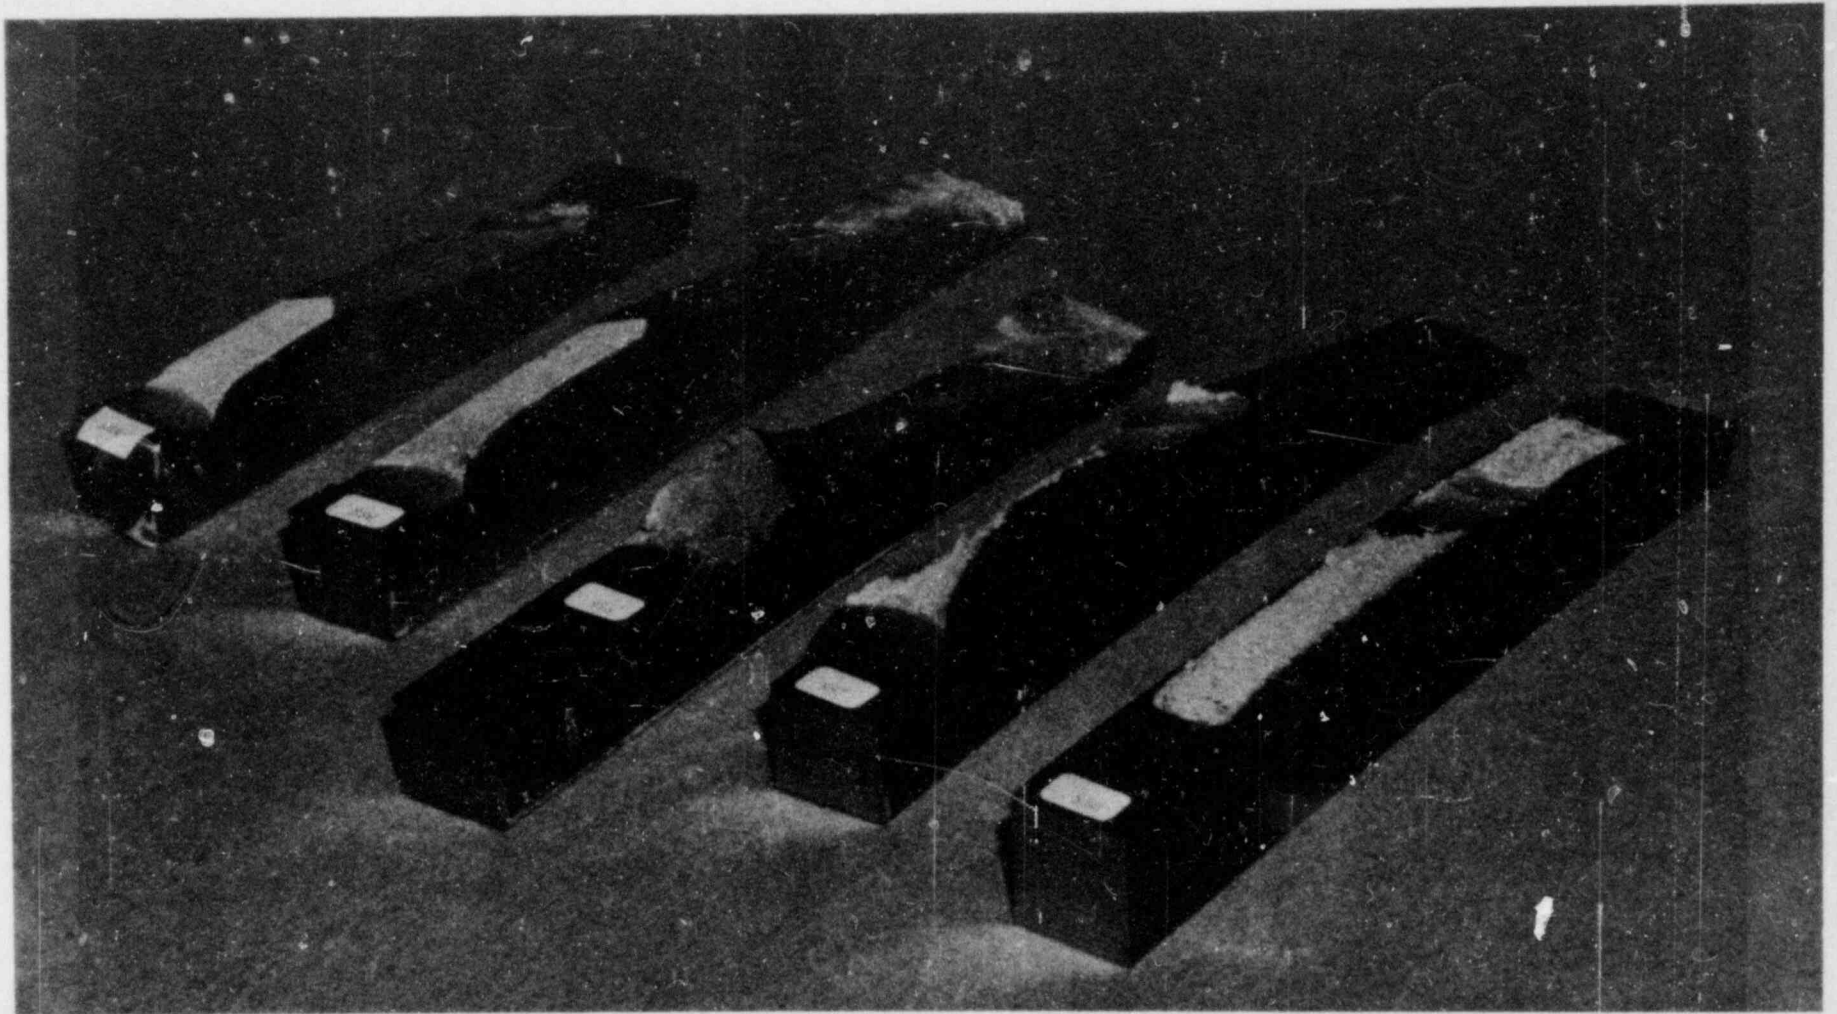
Fracture Surfaces of A240 Plate Test Specimens. Specimens
